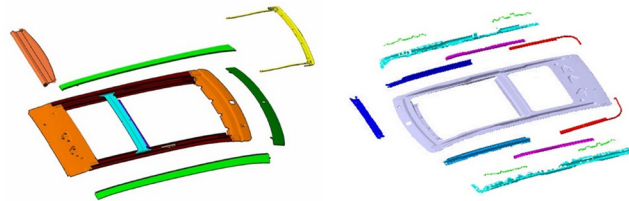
Exploded view of the roof modules. Systems prototype (left), original steel module (right).
